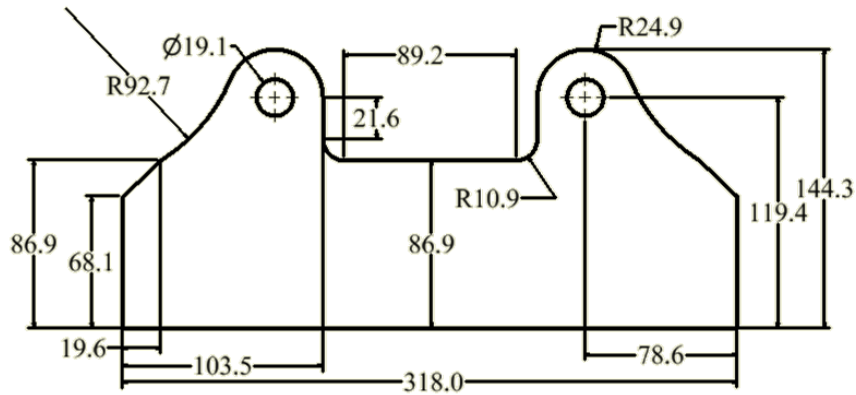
Dimensions of aluminum lug joint (dimensions in mm).
